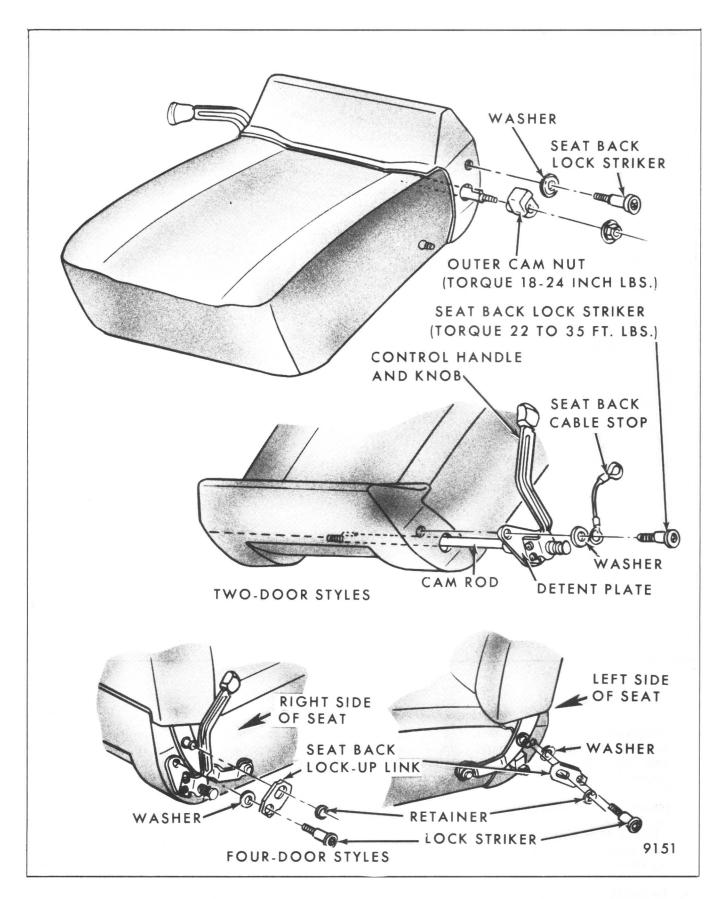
Adjustable Front Seat Back Assembly (Driver's Side Only) - Chevrolet "X" Coupes and Sedans
